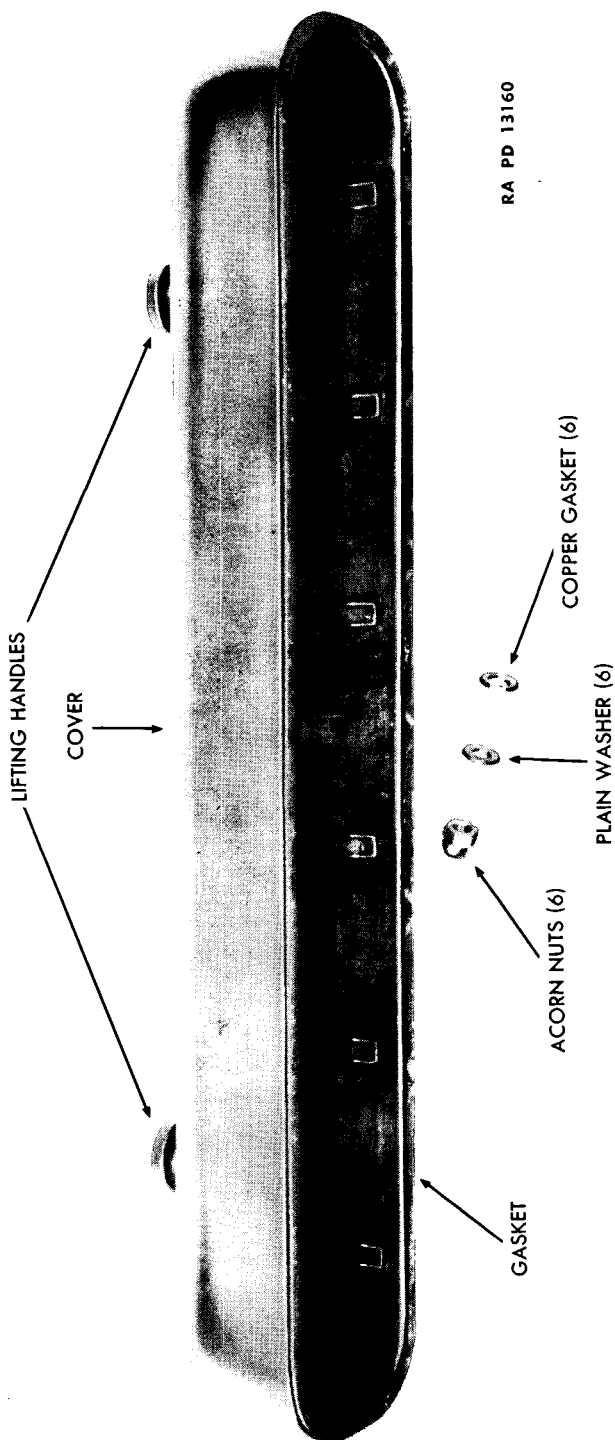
Cylinder Head Cover - (Hercules Diesel)
